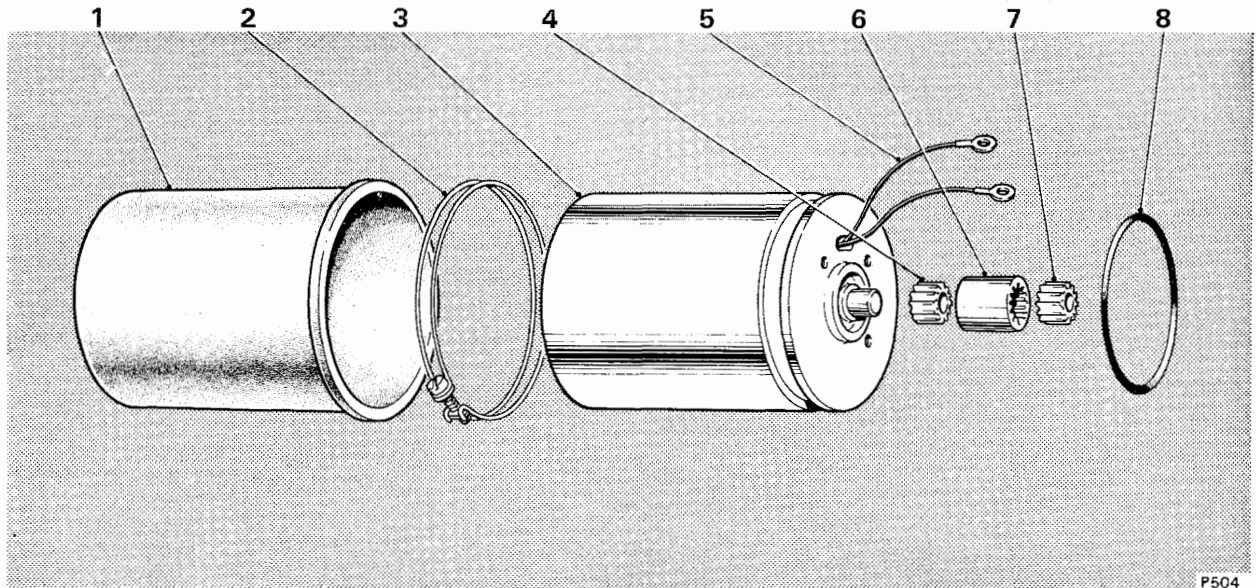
GEARCHANGE ACTUATOR MOTOR
